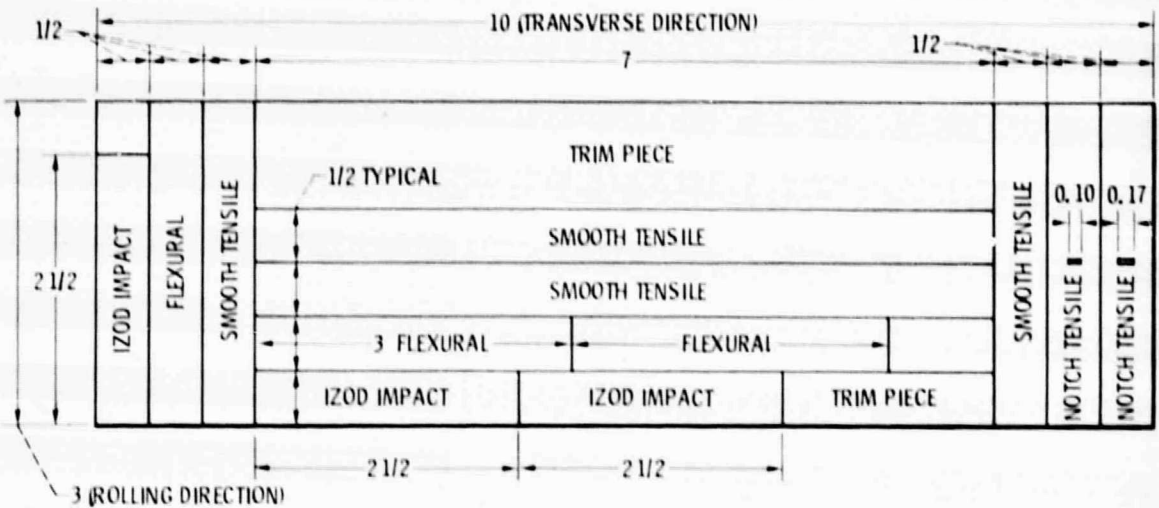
Typical specimen lay-out plan of fiber laminates. (Nominal values - all dimensions are in inches.)
